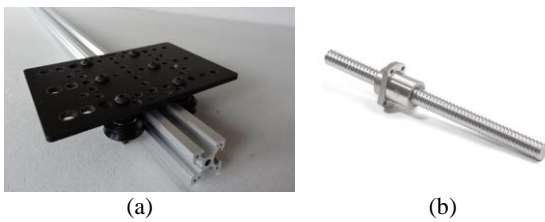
The moving mechanics; (a) V-wheel assembly, (b) Lead screw
